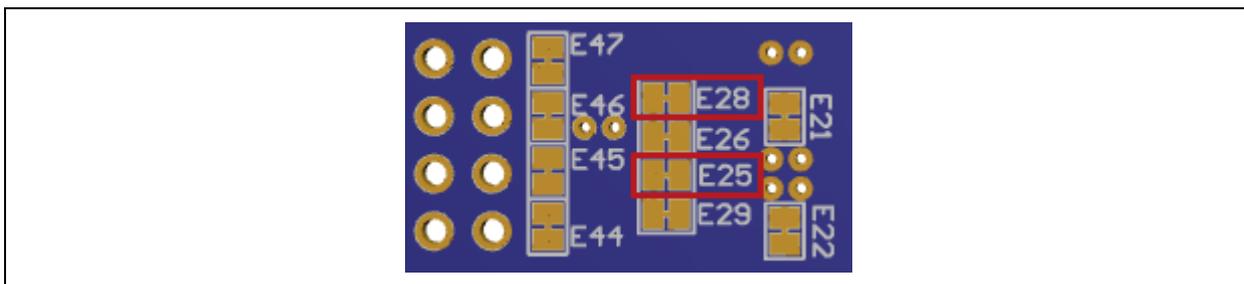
Jumper Trace Cut (Closed) for the VCOM Port (FPB-RA2T1 Bottom View)
